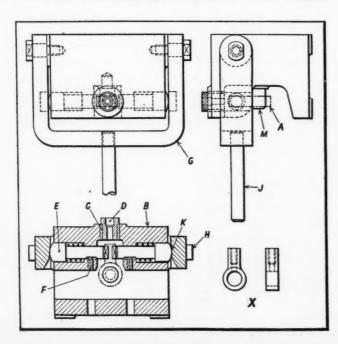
Fixture for Milling Carbide Tip Seat on Tool Shank
